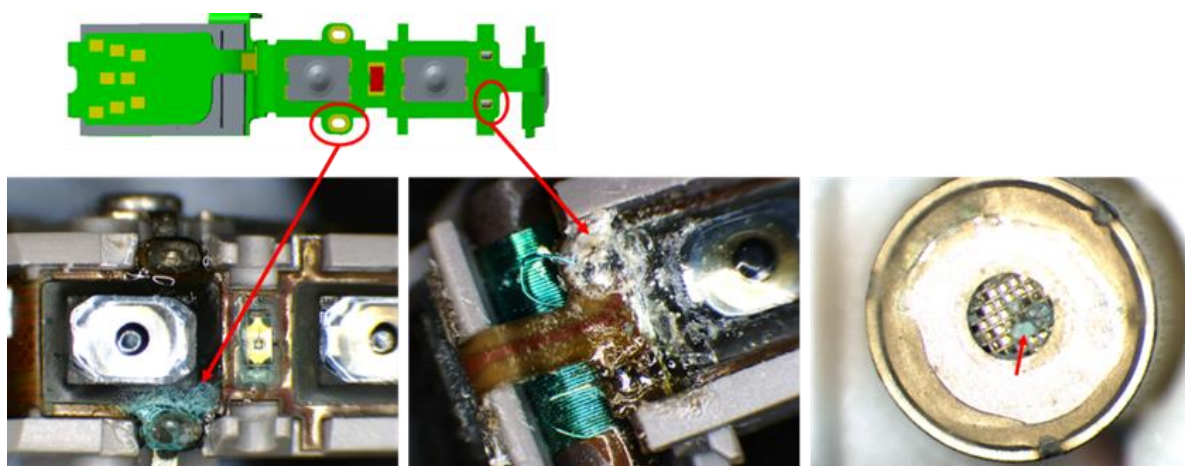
Optical macrographs of Type 1 HA after KOH corrosion test showing corrosion of hand solderings and microphone.
